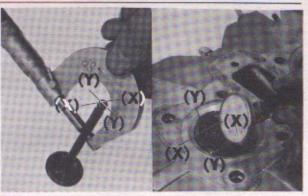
Measuring valve stem-to-valve guide clearance
